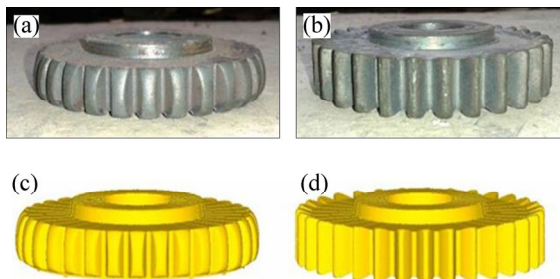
Tooth formation in gear forging Process I ($a=0$): (a) Forging trial, 85% punch stroke; (b) Forging trial, 100% punch stroke; (c) FE prediction, 85% punch stroke; (d) FE prediction, 100% punch stroke
